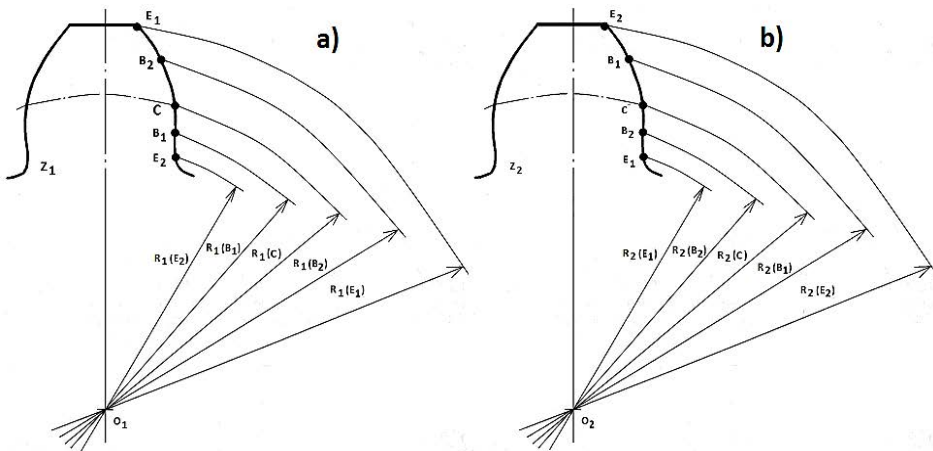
Location of characteristic points: a) on the tooth of the drive gear, b) on the tooth of the driven gear
